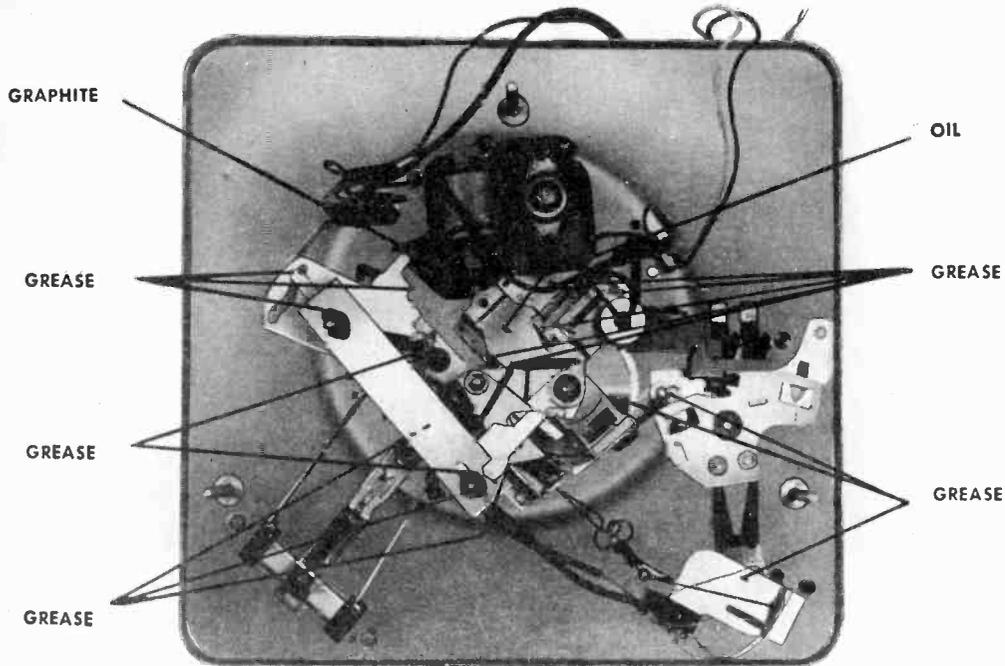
BOTTOM VIEW, SHOWING LUBRICATION POINTS
